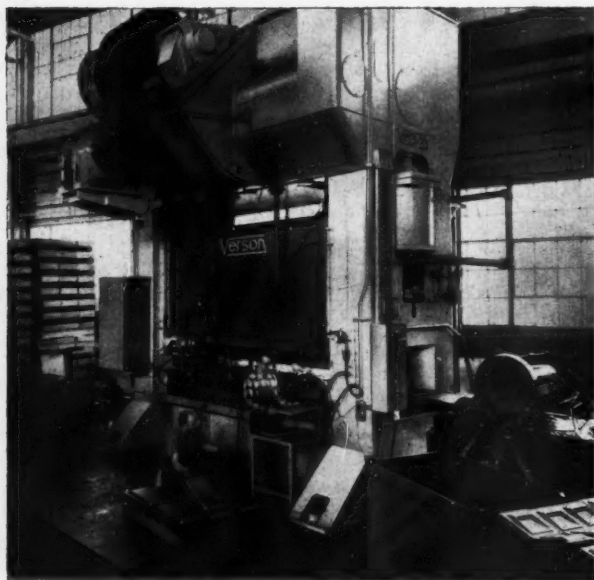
Verson 1,000-ton mechanical press set up with progressive tools for producing sheet-metal enclosures for electrical control equipment
